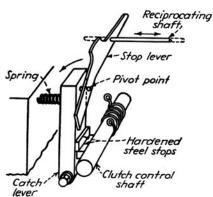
In this textile machine, any movement that will rotate the stop lever counterclockwise will bring it in the path of the continuously reciprocating shaft. This will cause the catch lever to be pushed counterclockwise and the hardened steel stop on the clutch control shaft will be freed. A spiral spring then impels the clutch-control shaft to rotate clockwise, which movement throws out the clutch and applies the brake. Initial movement of the stop lever may be caused by the breaking of a thread, a moving dog, or any other means.
